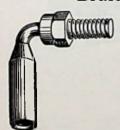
Fig. 793 is adjustable for wear. Spring tension around ball with screw for adjusting.
